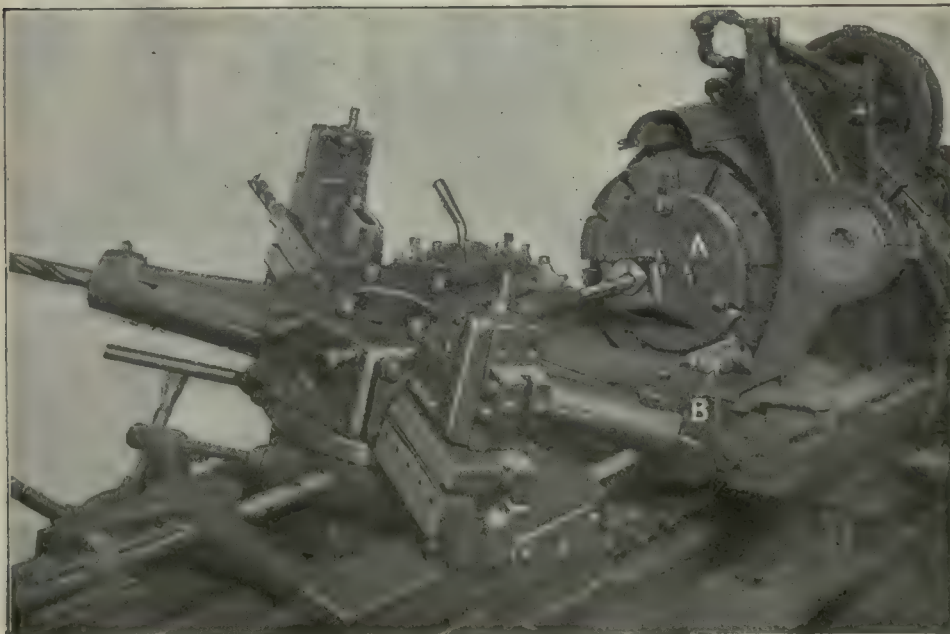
MACHINING FUEL AND AIR FEEDER CONNECTION
